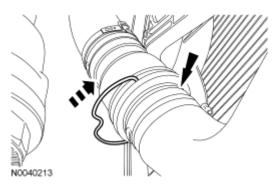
Locating Halfshaft Circlip Courtesy of FORD MOTOR CO.
